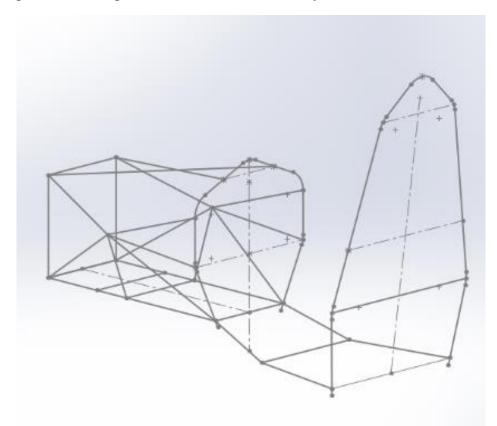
Isometric view showing fully defined cockpit floor structure
